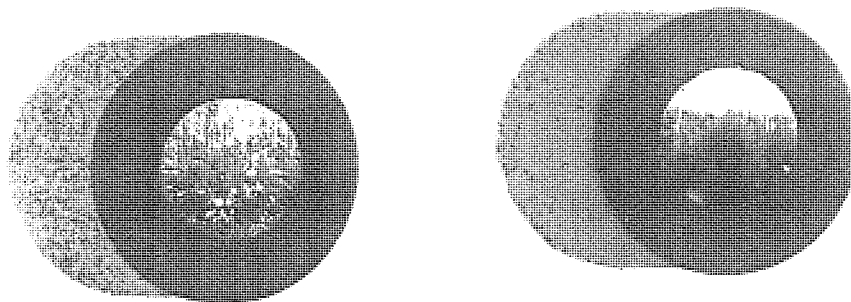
Photograph showing castings from a TMBS treated mould(right)
